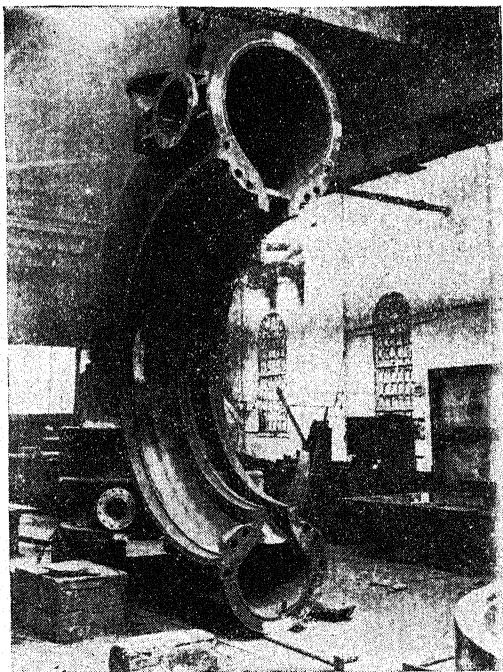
Lower half of casing in position during welding of large inlet flange.
